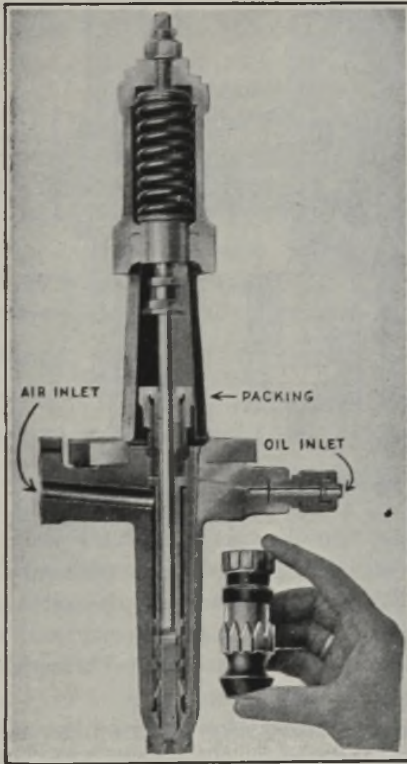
Cross section of spray valve (Hesselman system) on McIntosh and Seymour Diesel engine; at right, atomizer disassembled.
